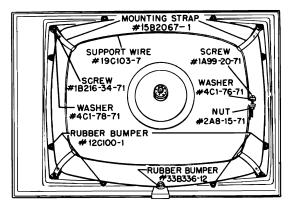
Rear View of Escutcheon with Picture Tube Mounted, Chassis Removed.
